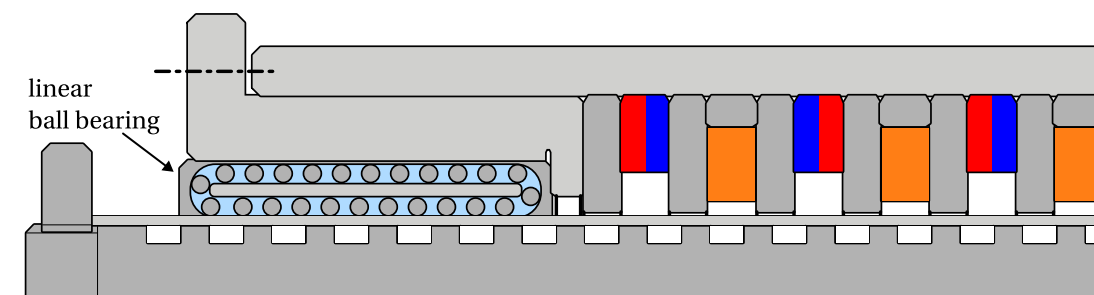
Sketch of the implementation concept of the FSPMLM generator based on a linear bearing and a steel tube. See appendix A.5 for a technical drawing.
